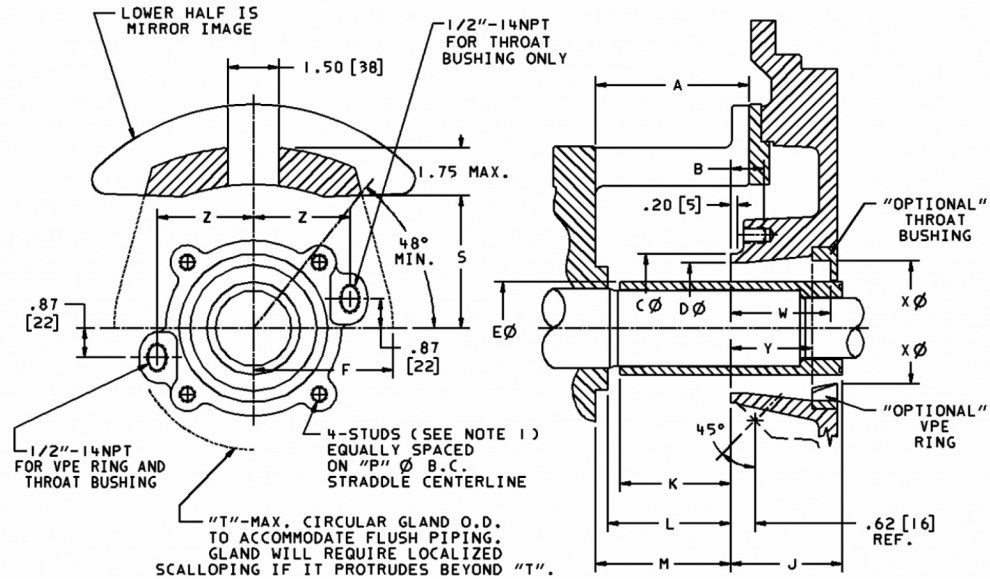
3181/3186 mechanical seal, drawing A07209A, revision 1, issue —
